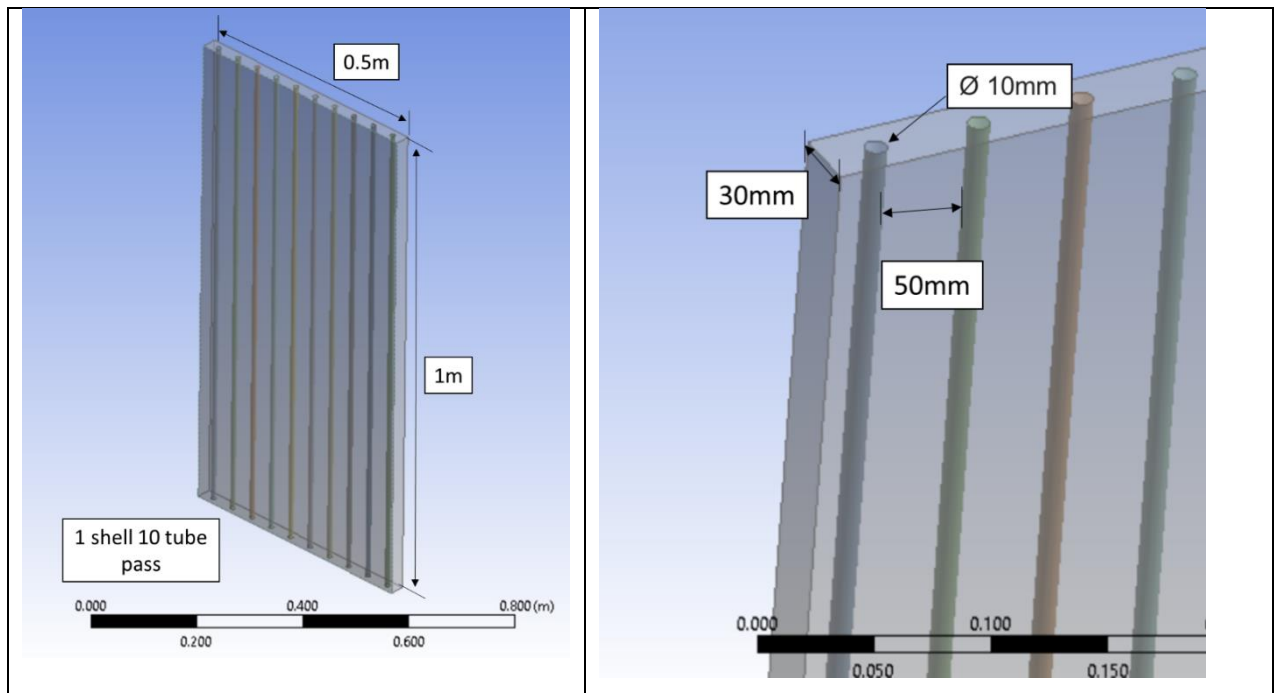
3-D design of air pre-cooler with 50mm pipe gaps
